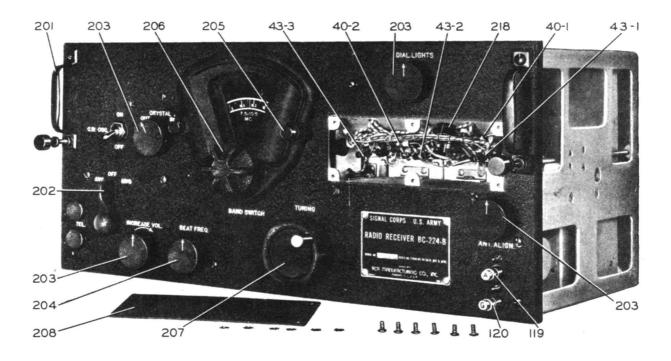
RADIO RECEIVER BC-224-B: FRONT VIEW OF CHASSIS WITH TUBE SHELF COVER REMOVED
